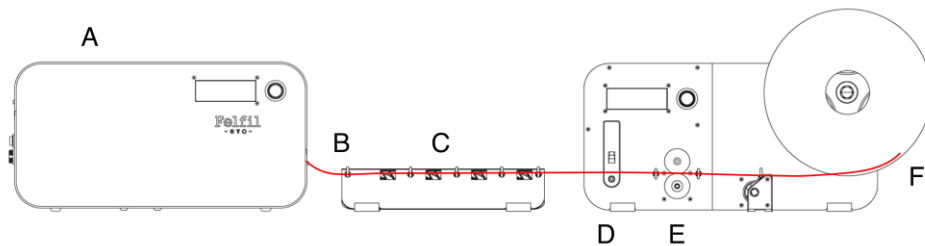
PBAT extrusion line scheme: A – extruder; B – wire extrusion head; C – air cooling system; D - optical sensor; E - filament pull spools; F - filament winder.
